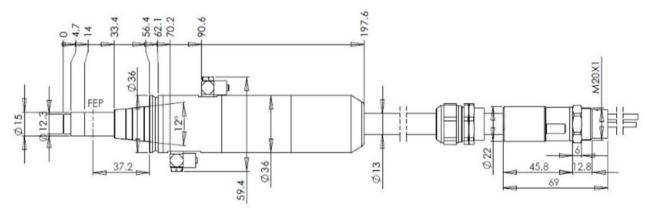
External dimensions of the RFL-QD fiber delivery cable connector
